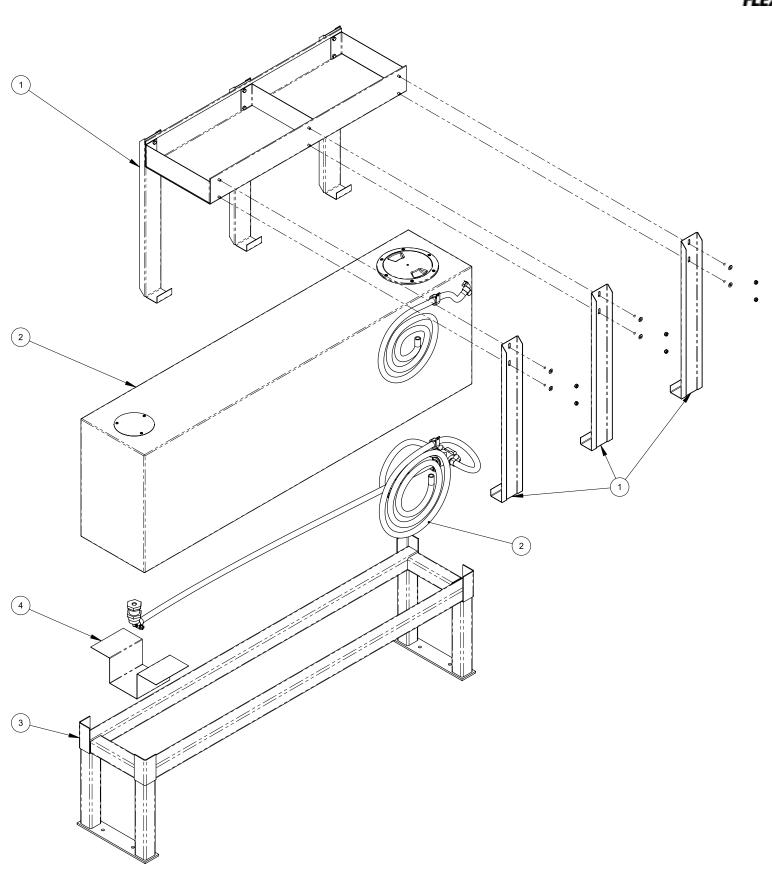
50 Gallon Tank Flex Kit Assembly 000-163-751 Rev. C
